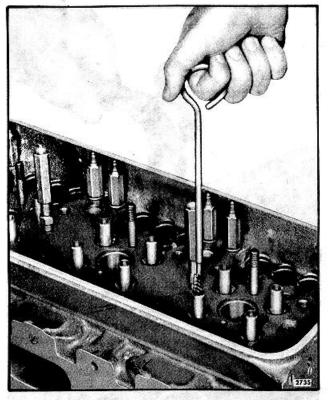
Cleaning Valve Guide the valves or install new valves. If the valve heads are warped, replace the valves.
